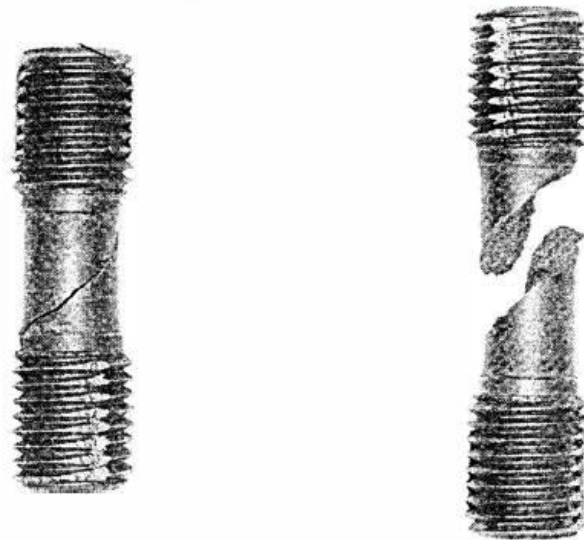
Fractured cast iron specimen in torsion. The photograph on the right shows the specimen more widely separated.
